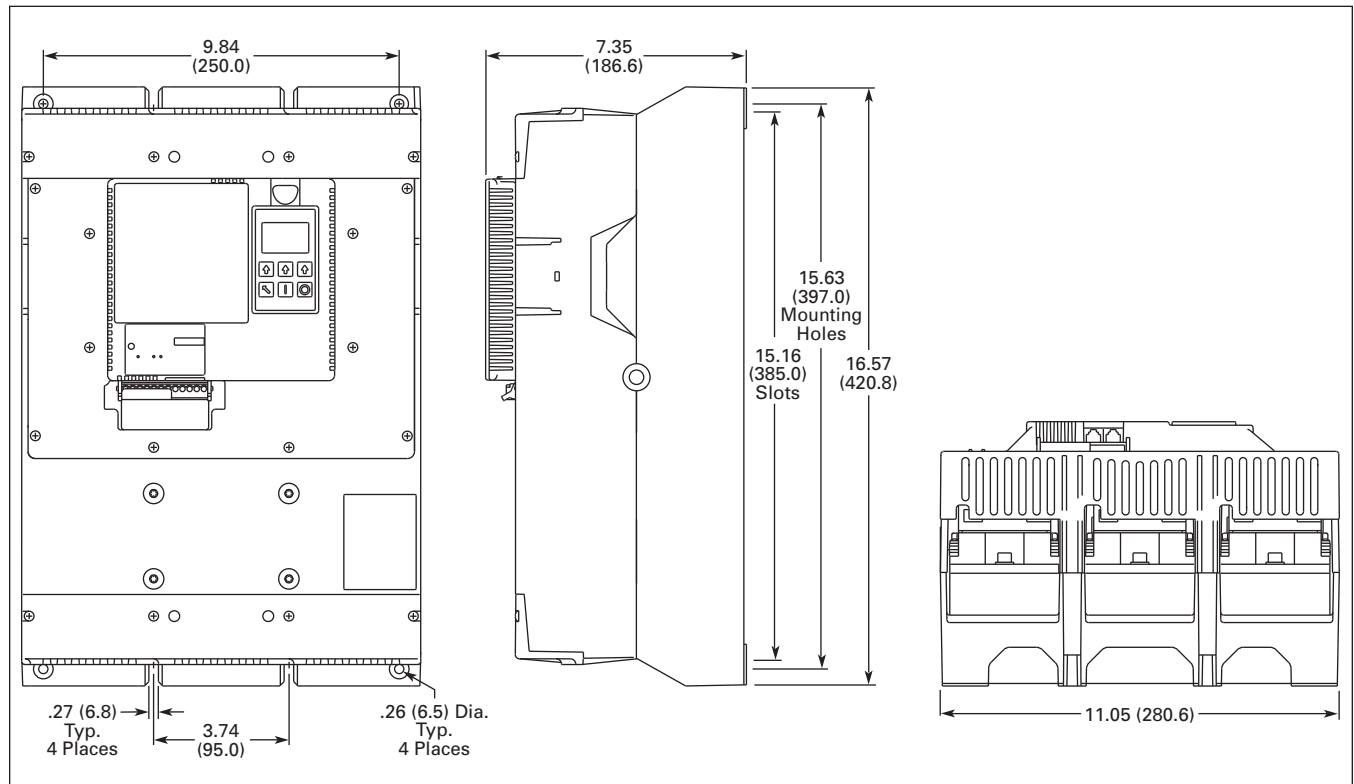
V-Frame (290 mm) S811 Approximate Dimensions in Inches (mm)
